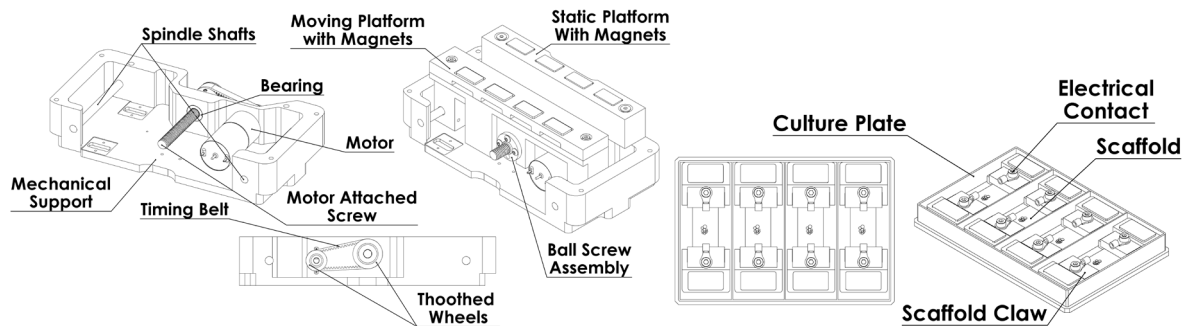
Stretching mechanics interior module and culture plate setup to hold and stretch scaffolds.
